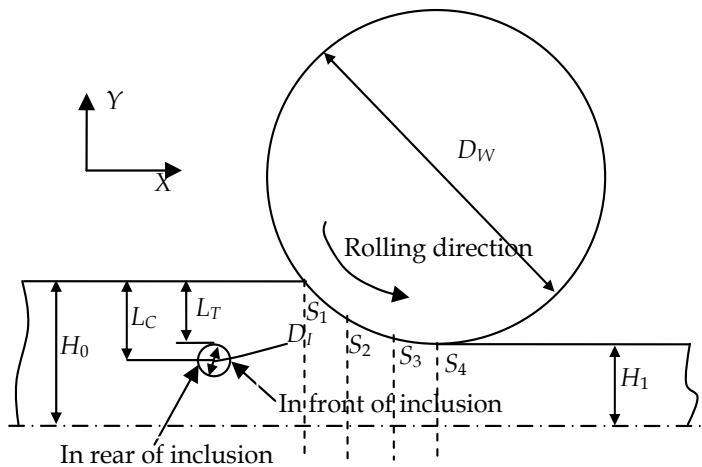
Schematic drawing of rolling strip with a spherical inclusion
